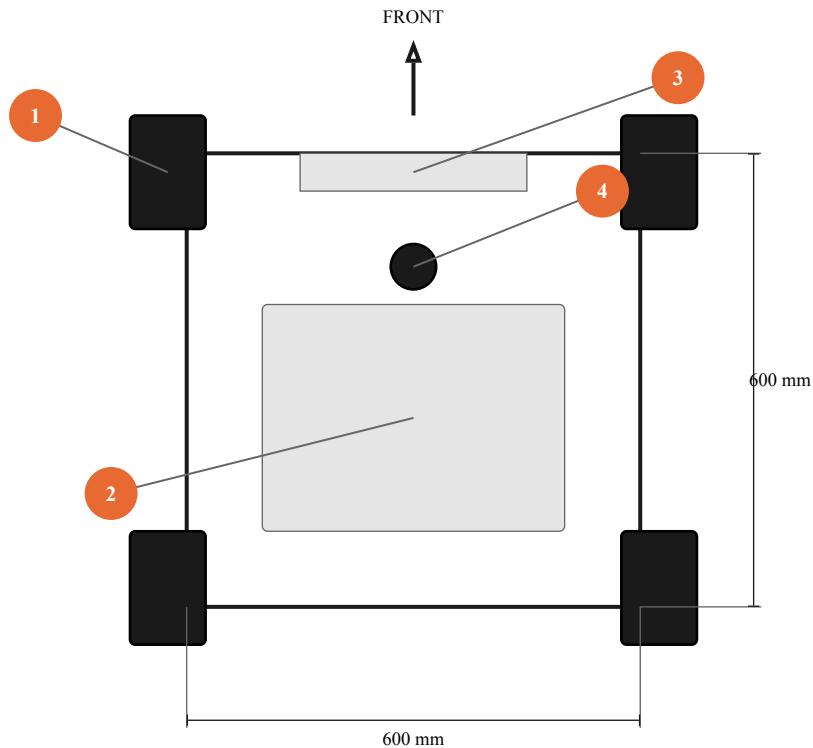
BVR0 top view: (1) Hub motor wheels, (2) Electronics bay, (3) Tool mount, (4) Sensor mast
